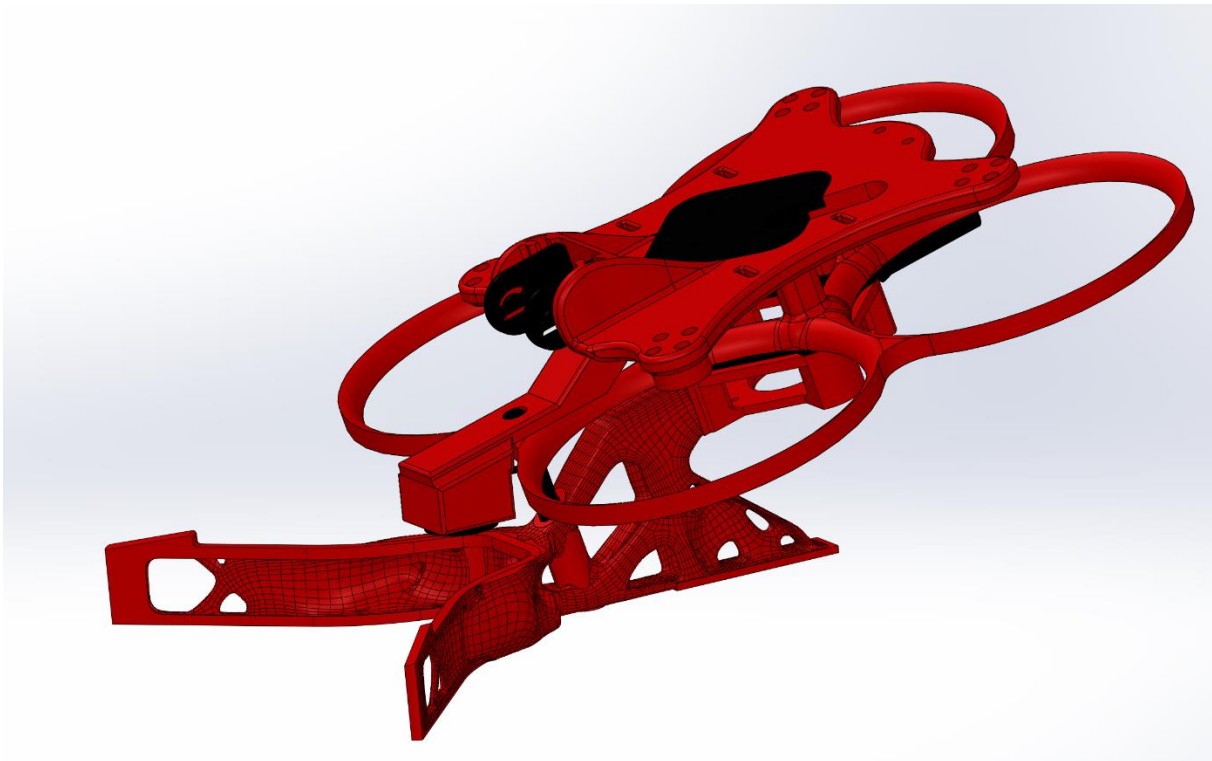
Final CAD assembly of all 3D-printed frame parts.
